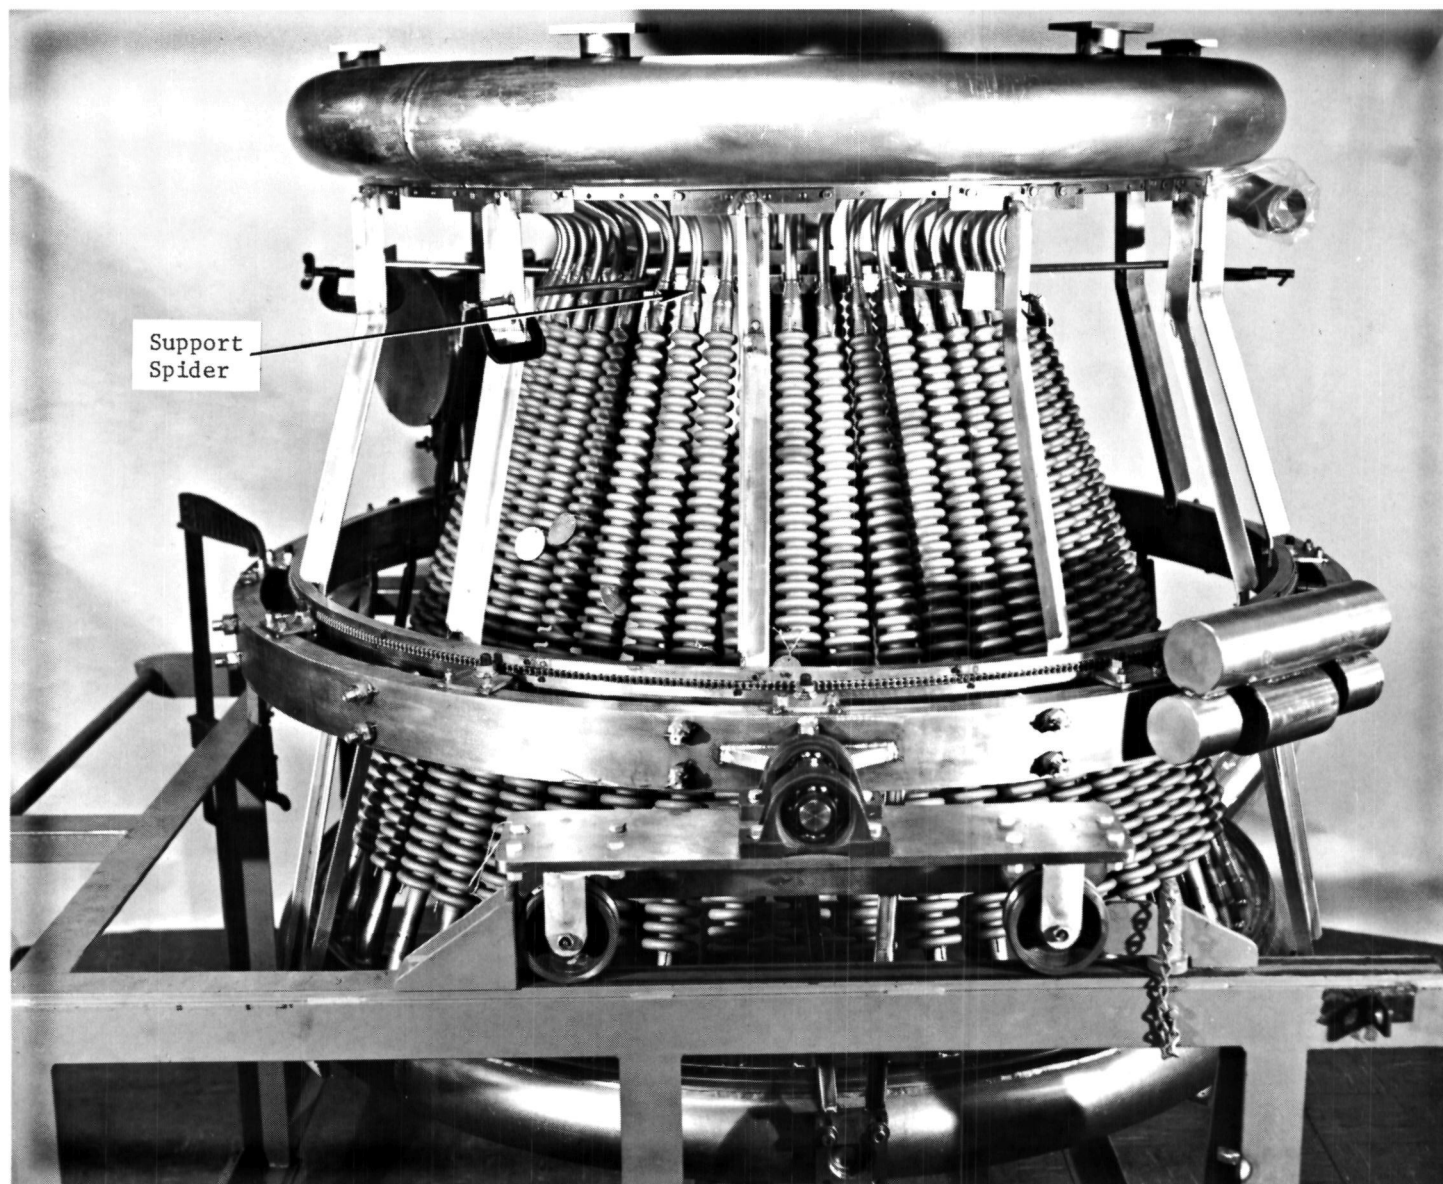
Gas System Set-Up for Assembly Welding. (P69-10-2B)
